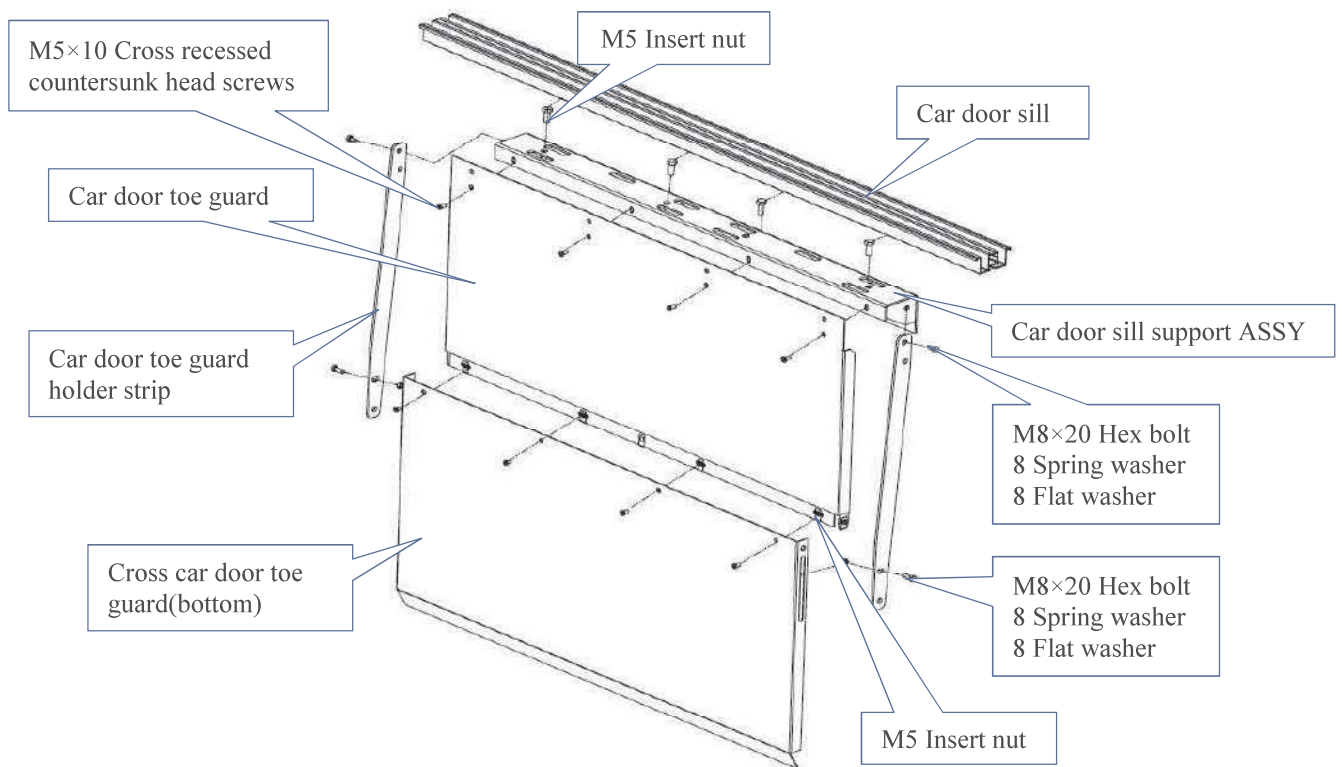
The connection between the car door toe guard and the sill bracket
